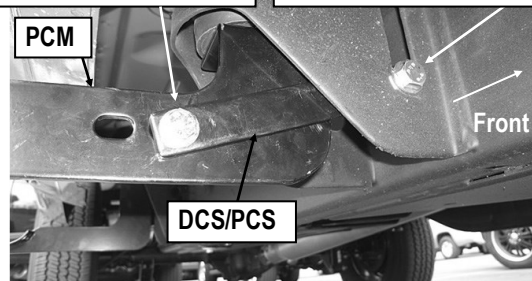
Passenger Front Support Bracket Installed (Up to 2007 2500/3500 Models)
